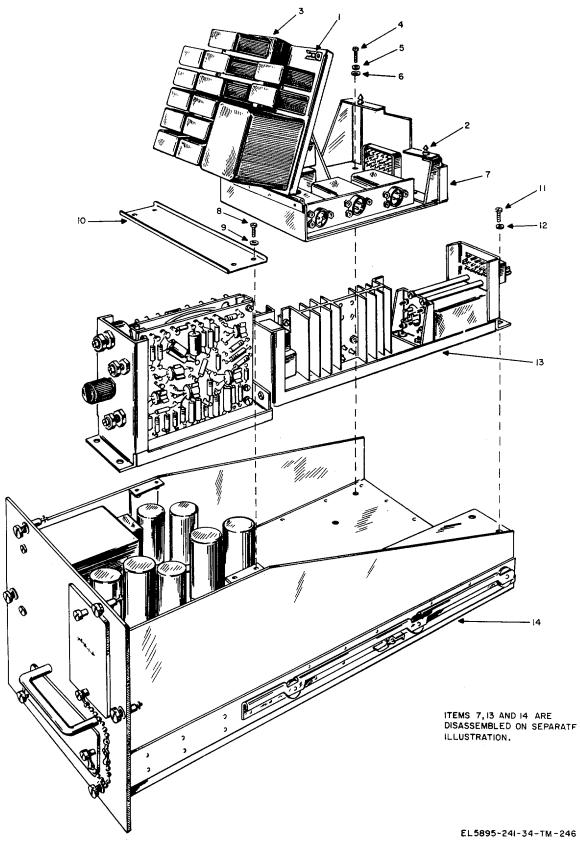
Power supply drawer assembly (part of OA-3014/FSW-8), removal of assemblies.
